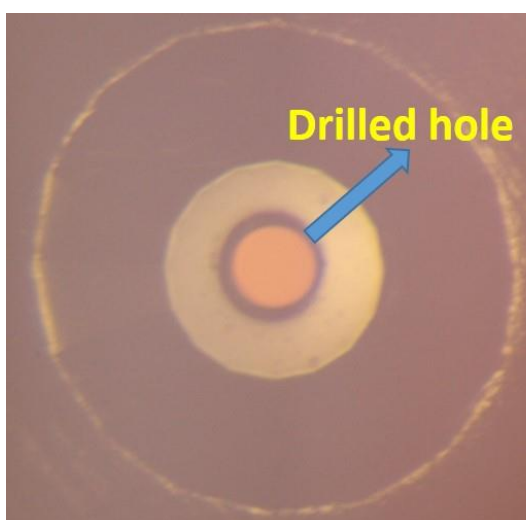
Photograph of the drilled hole in a pre-indented gasket.
